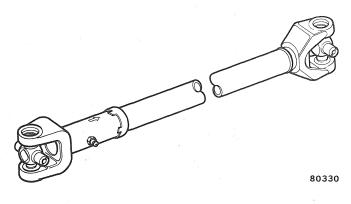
E-2 Front Propeller Shaft Assembly—CJ
